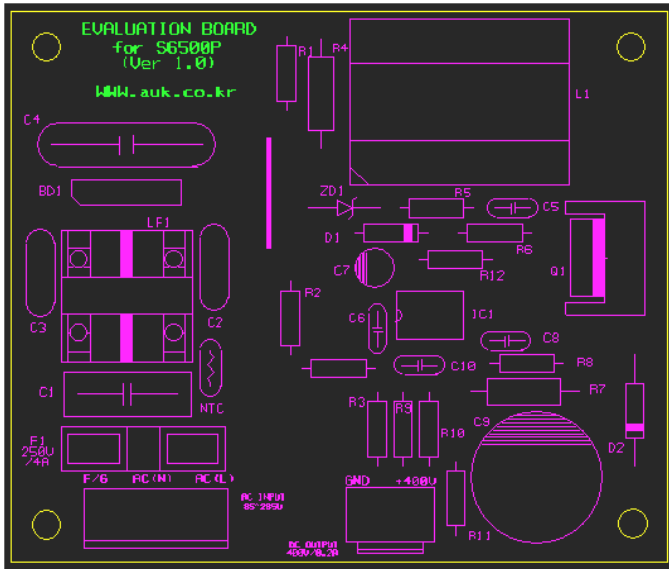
80W : PCB and Component Layout (Top view, real size 75x90mm)
